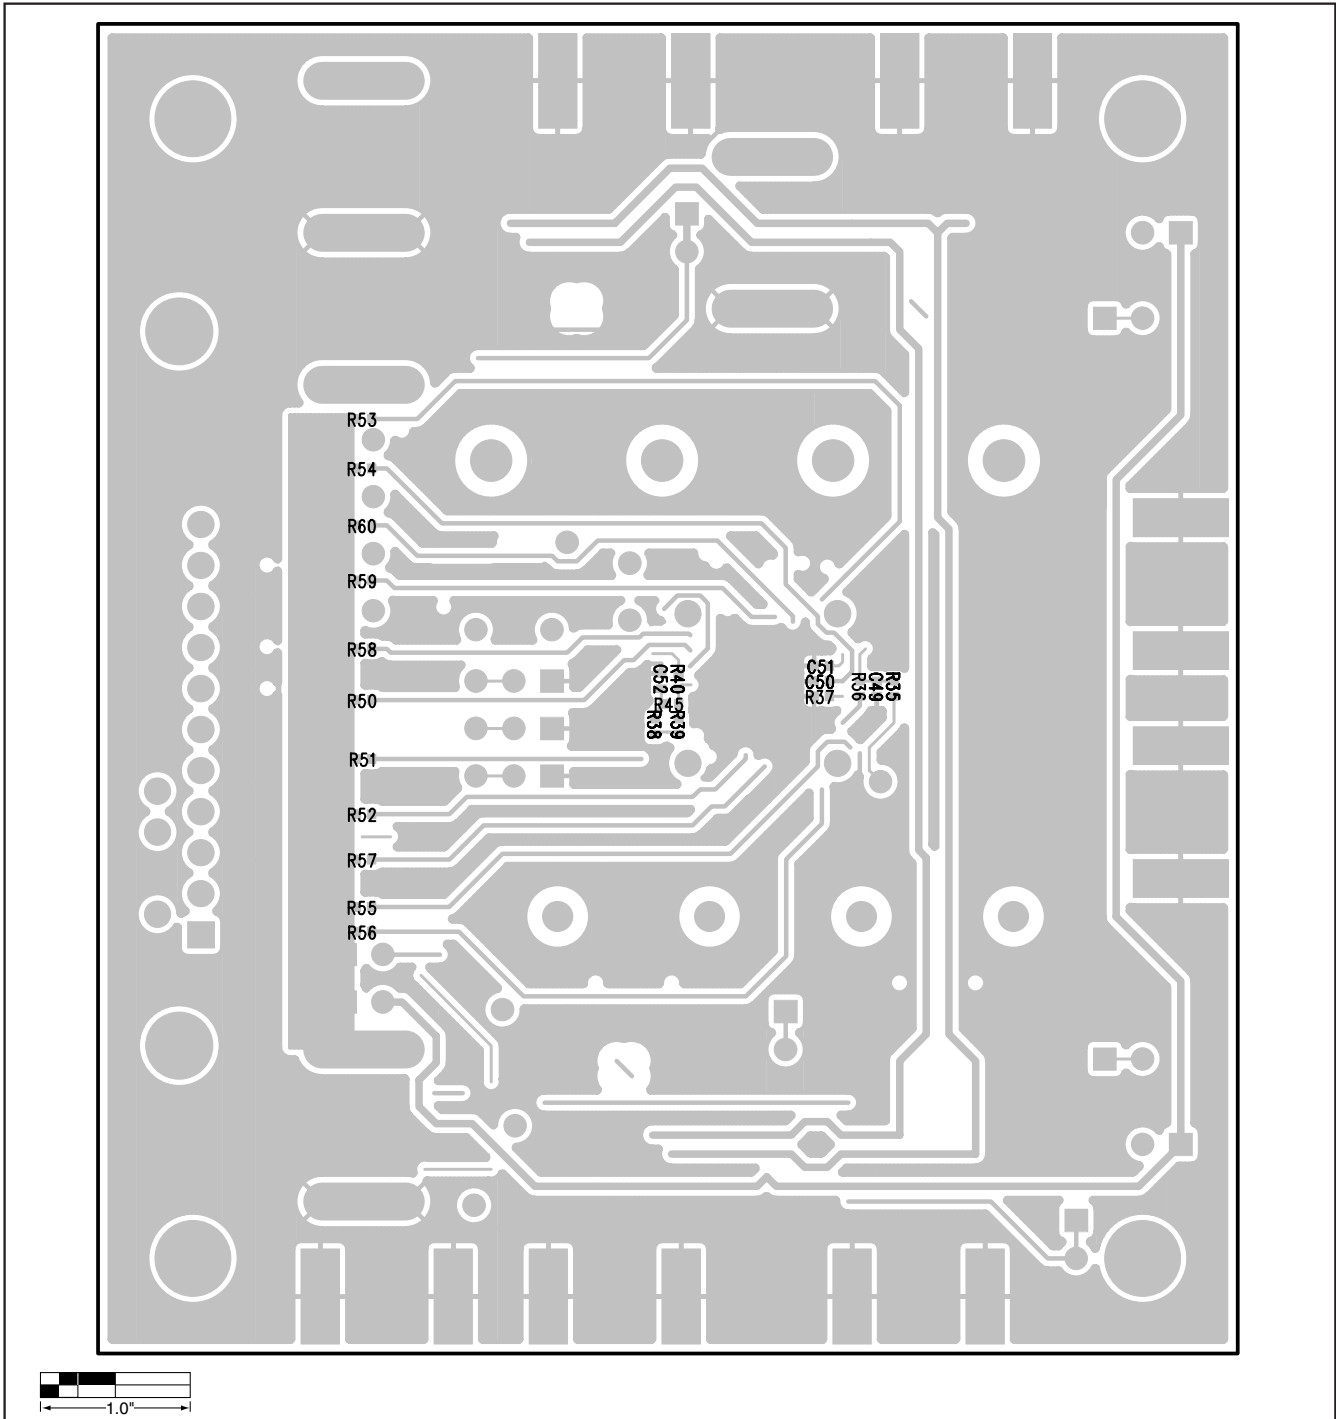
MAX2820/MAX2821 EV Kits PC Board Layout—Bottom Silkscreen
